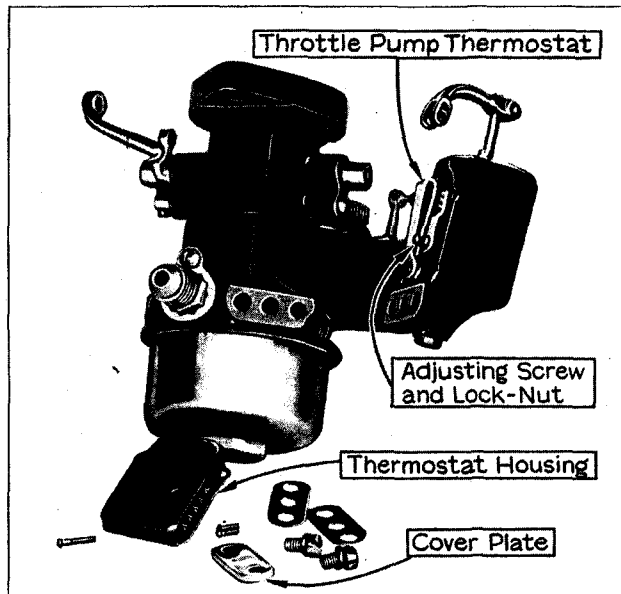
The vents in the thermostat housing on the throttle pump should be kept open.
